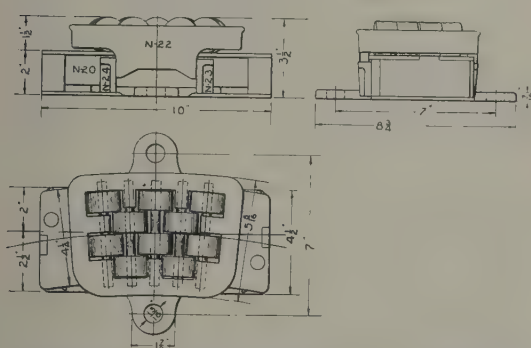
Creco Roller Side Bearing for Freight Cars.
